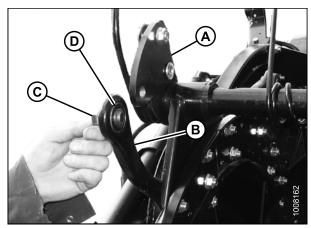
Bar Crank Attachment Holes and Link Alignment
